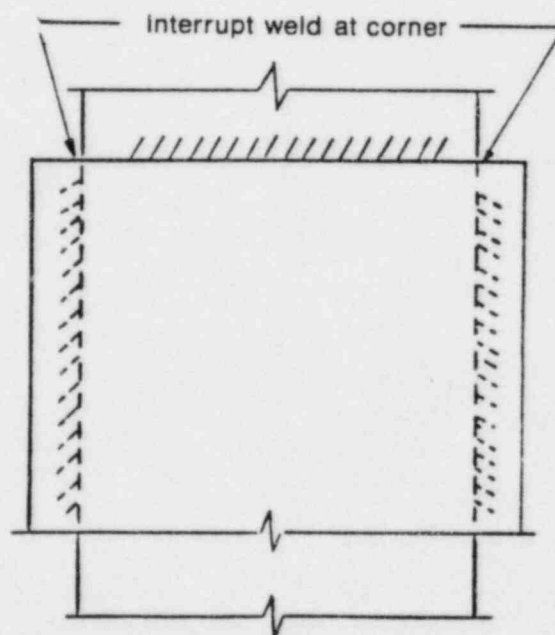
Fillet welds on opposite sides of a common plane.
